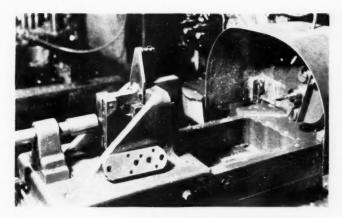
Four %-inch holes are bored in the side plates in the specially designed boring setup shown here.
